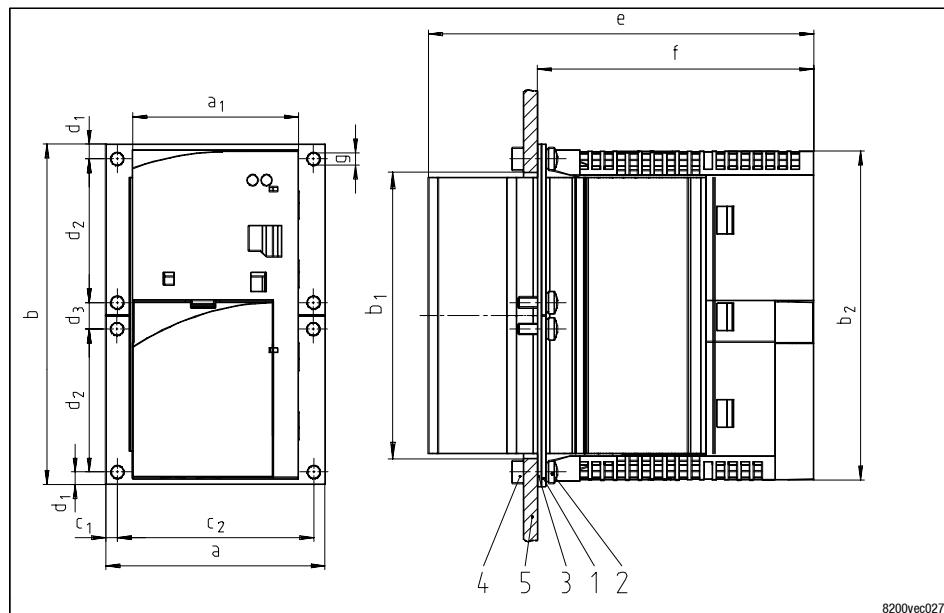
Dimensions for thermally separated mounting 0.25 ... 0.75 kW
